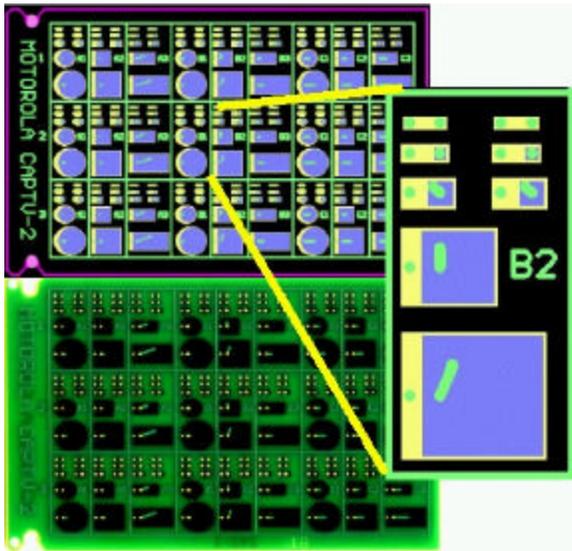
Layout Drawings and Photo of CapTV-2 Design
